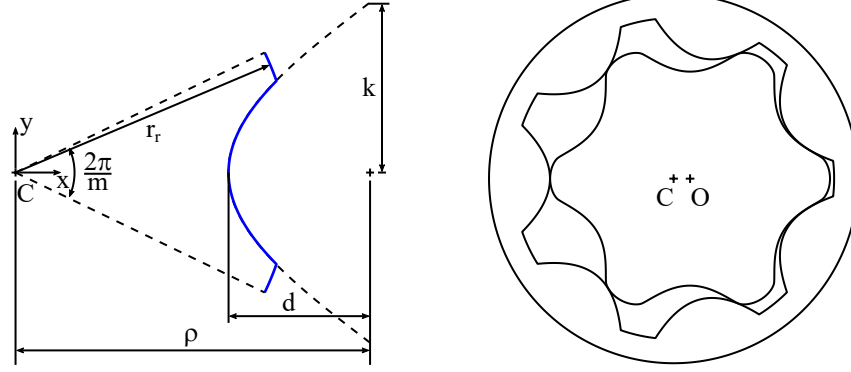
Cosine gerotor outer gear tooth form with $m = 7$, $\rho = 25$ mm, $d = 10$ mm, $k = 12$ mm, and $r_r = 19.5$ mm (left) with complete outer and matching inner gears for $e = 2$ mm (right)
